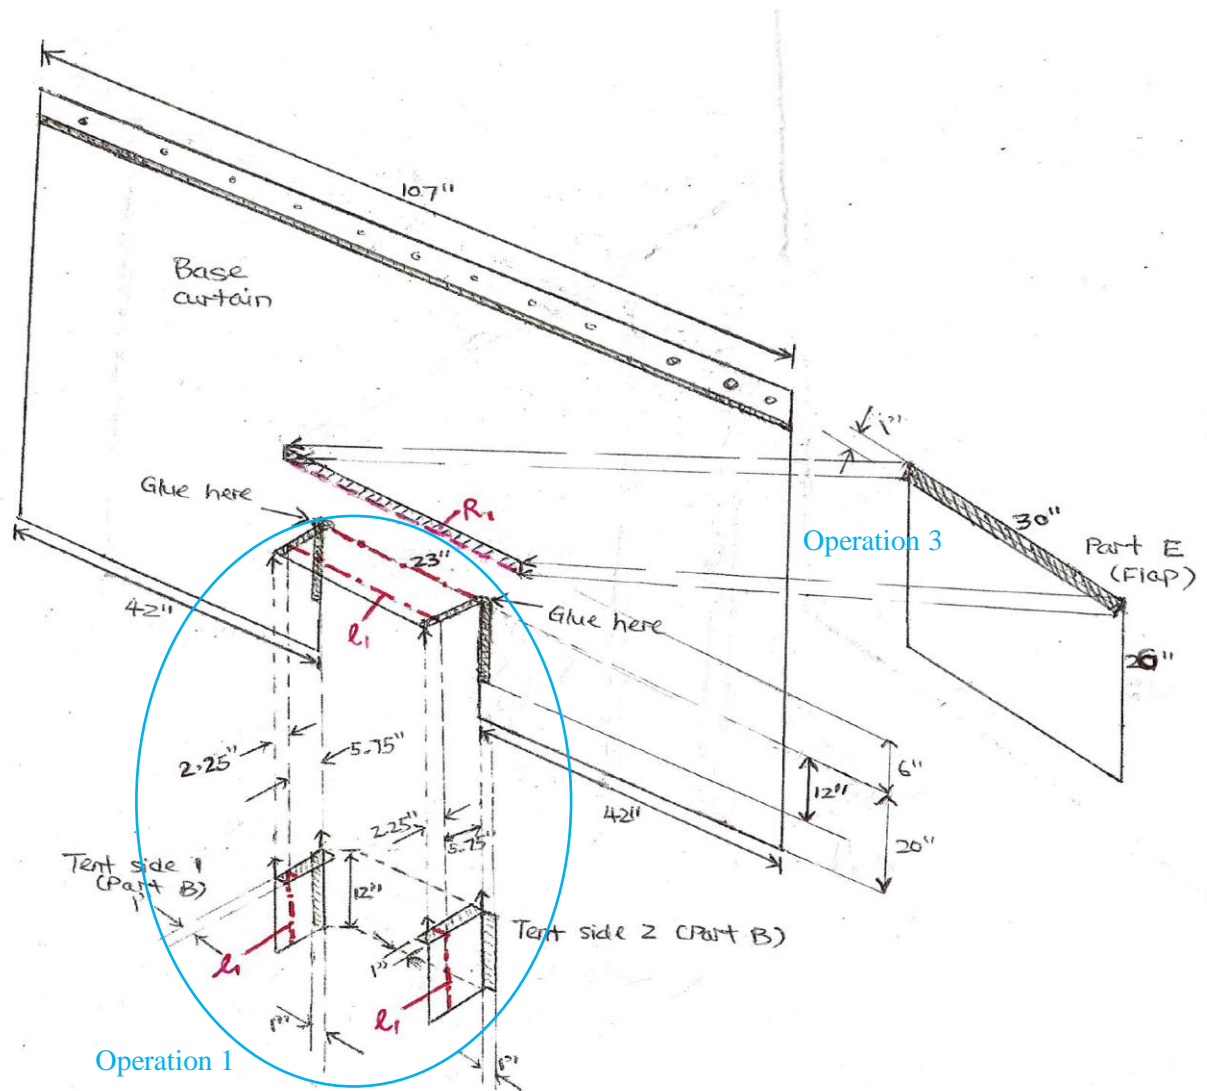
Assembly of parts for shower curtain; shaded areas show the seal locations
